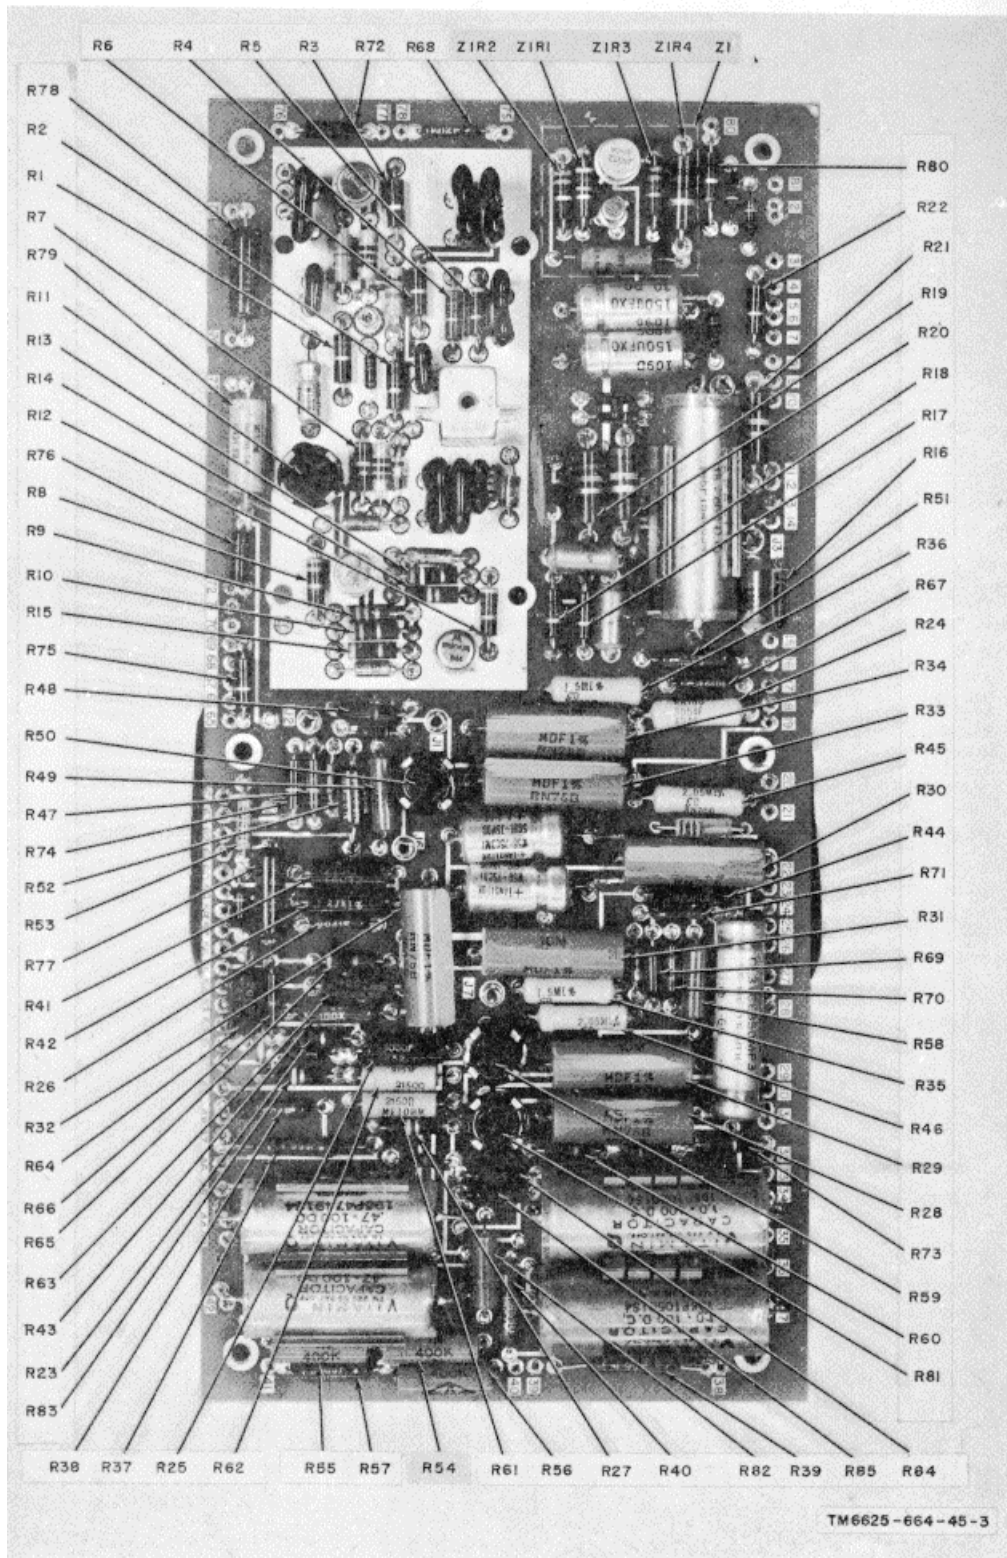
Printed circuit board No. 1 (AN/APM-247), parts location.
